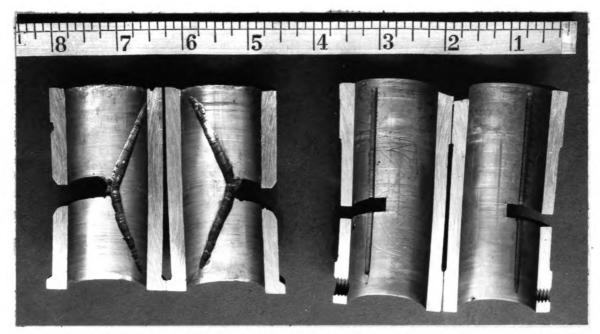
Lft.- Adequate Oil Scoops. Hand Cut Grooves, Haggled but Fair. Rt.- Sharp Narrow Dist. Grooves Too High.
